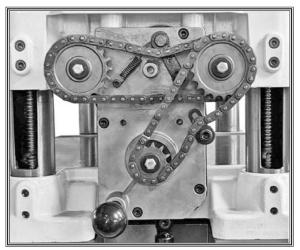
Drive chains and sprockets for infeed and outfeed rollers.
